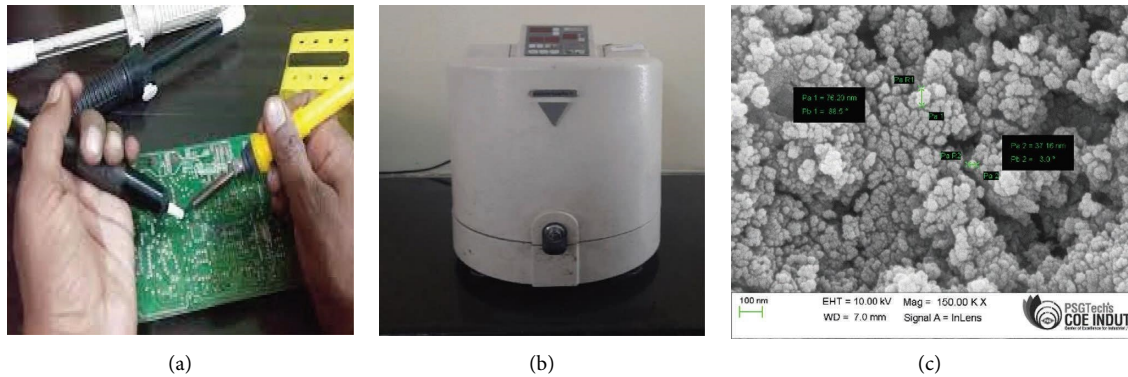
Pre-treatment of PCB board and production of nano PCB particles: (a) desoldering, (b) planetary monomill, and (c) FESEM image of the produced nano PCB.
